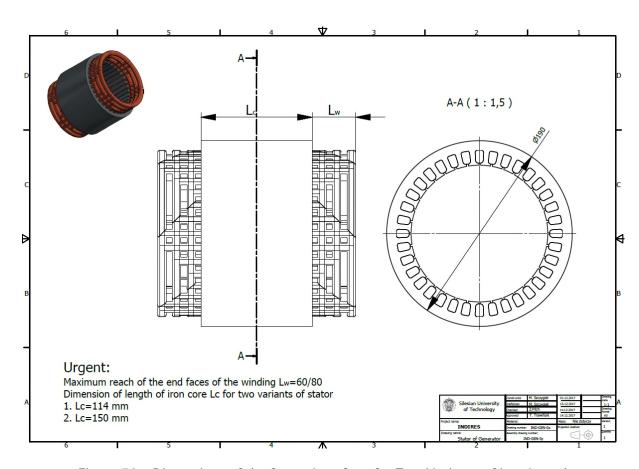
Dimensions of the Stator Iron Core for Two Variants of Iron Length (the Same Dimensions for Generator and PMSM Motor)
